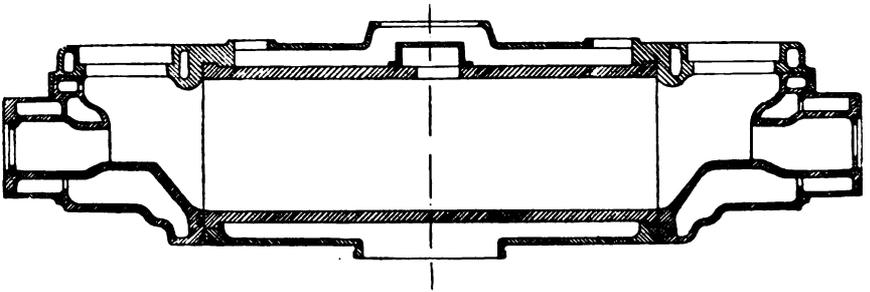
Section of Cylinder, Koerting Engine.
